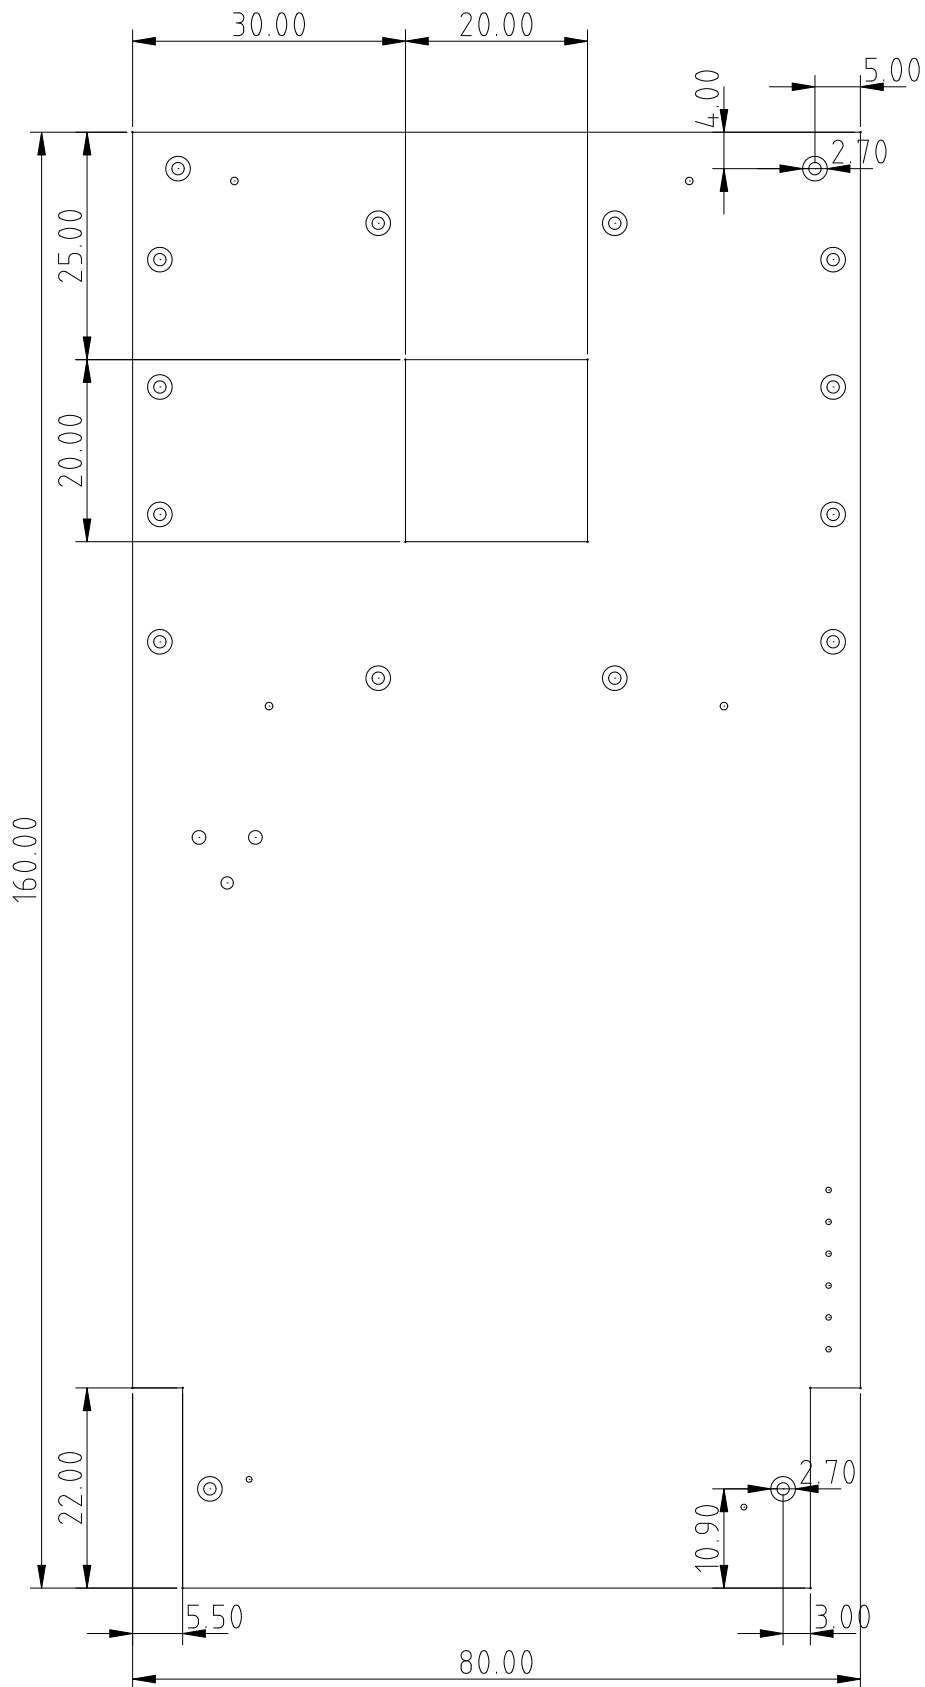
Motherboard mechanical drawing. The motherboard has four mounting holes in the corners. Additional dimensions for the daughterboard fixation are included in the daughterboard drawing.
